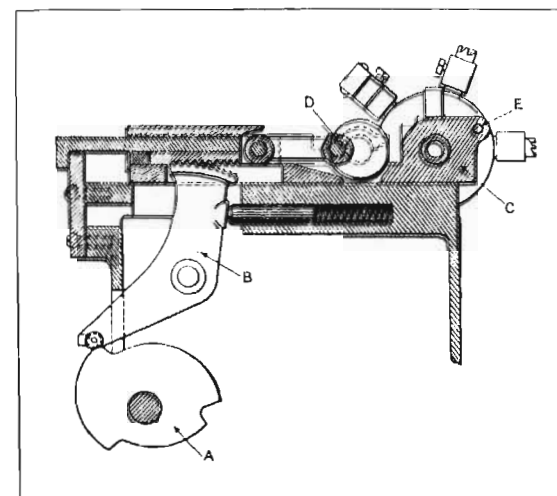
Turret Slide is Withdrawn Quickly when Crank *D* Rotates
